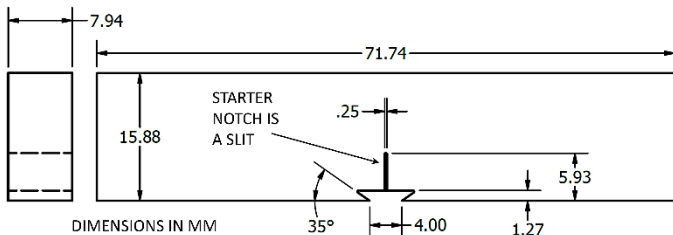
NOMINAL DIMENSIONS OF THE SINGLE-EDGE NOTCHED BEND, SE(B), SPECIMEN. SIDE AND FRONT VIEWS ARE ILLUSTRATED.
